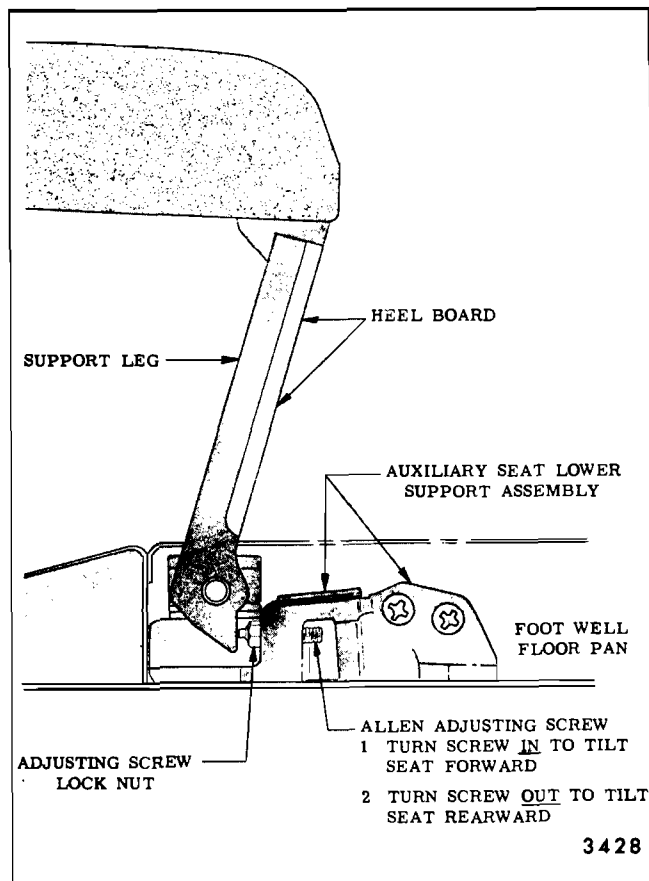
Auxiliary Seat Adjustment - Cadillac Limousine Styles
